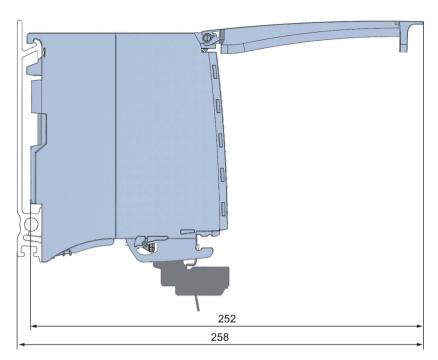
Dimensional drawing of the TM PTO 4 module, side view with open front panel
